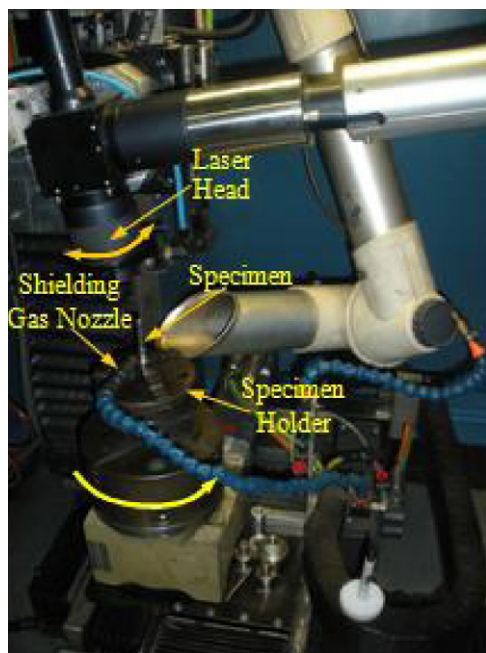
Photographic view of Nd:YAG laser-welding system.
